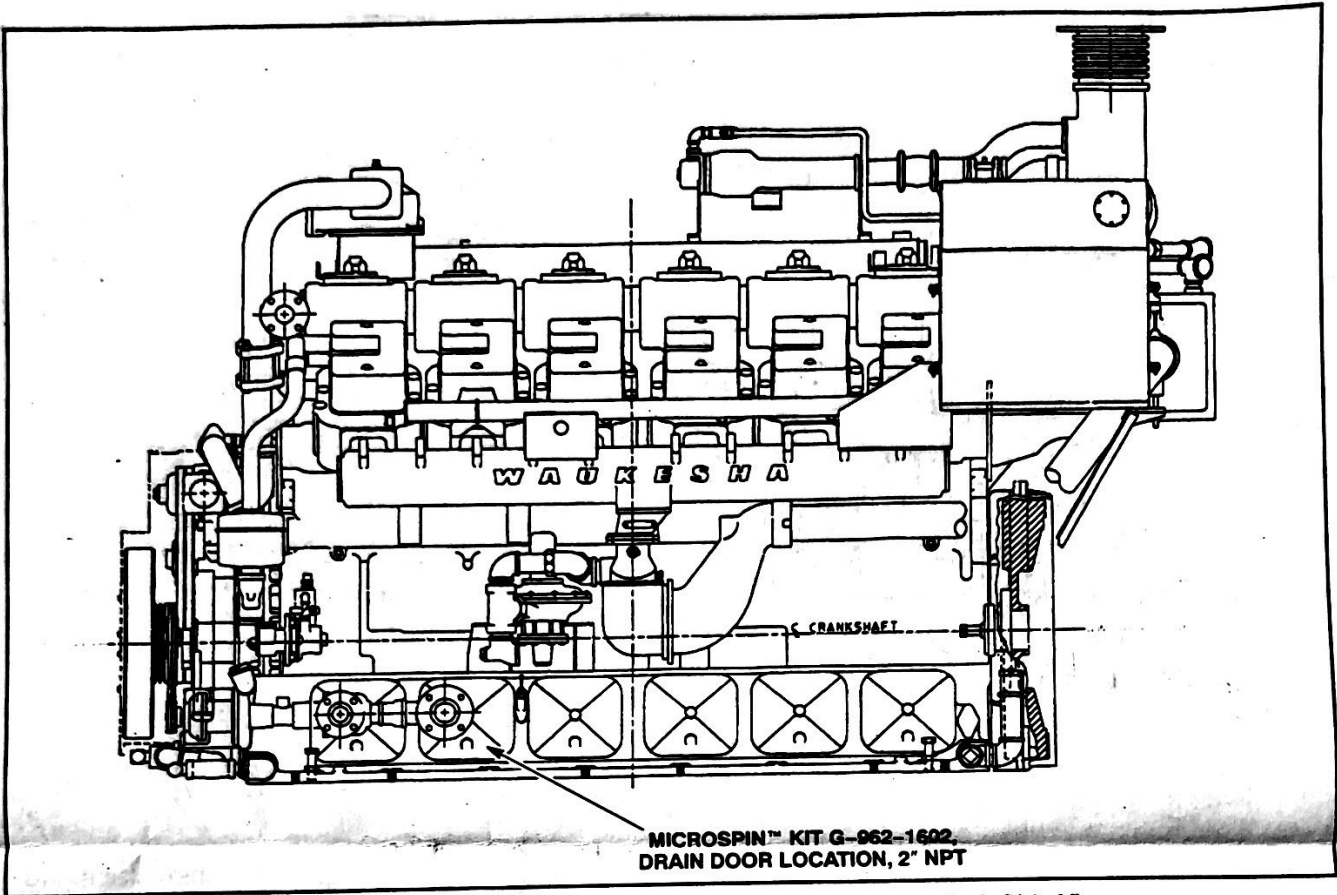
12 Cylinder VHP P/N 489189 Connection Locations - Left Side View
